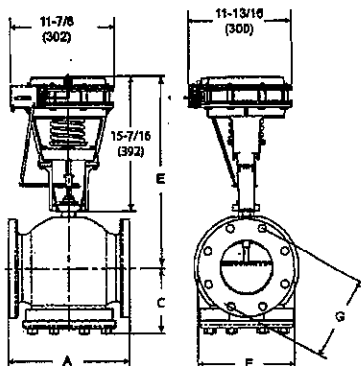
MK-6911 with Flanged 2-Way Globe Valves
